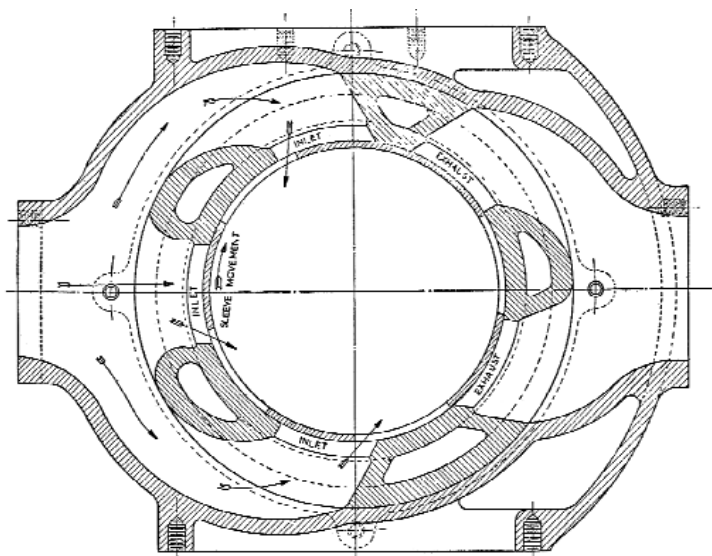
Section through the Ports of a Single-Cylinder Sleeve-Valve Engine Showing Induced Swirl (Ricardo [1])
